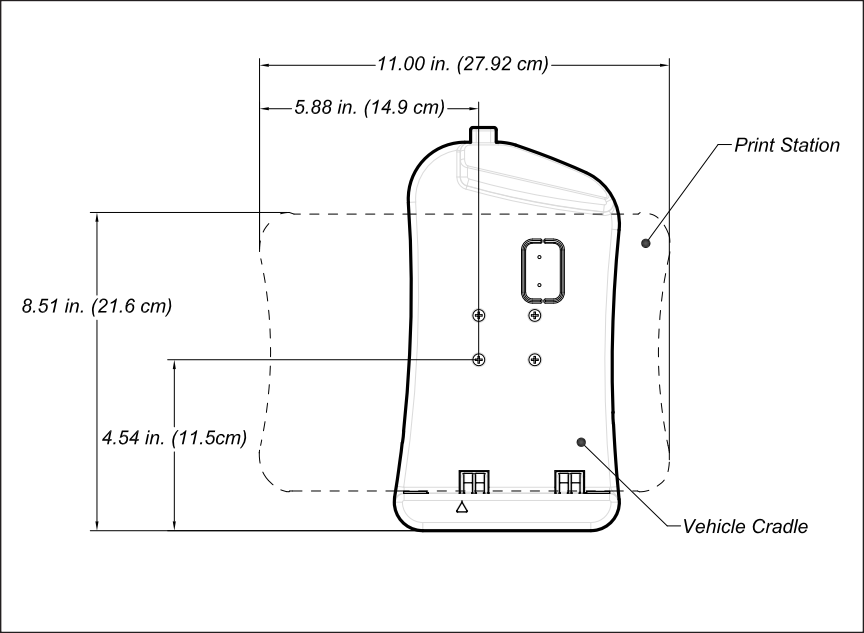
RW 420 Print Station Vehicle Cradle Mounting Dimensions
